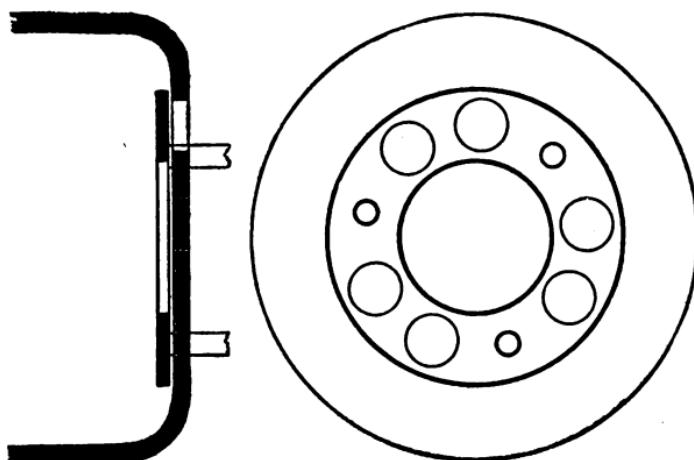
Automatic ring valve; a flat ring with three stems extending through the cylinder head, and closing six openings through which gas is admitted, when suction of the piston pulls down the ring against the tension of springs.
